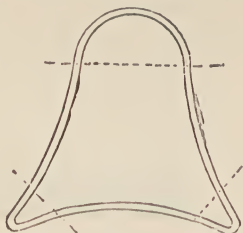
PATTERN FOR MAKING INSIDE FLANGES.
